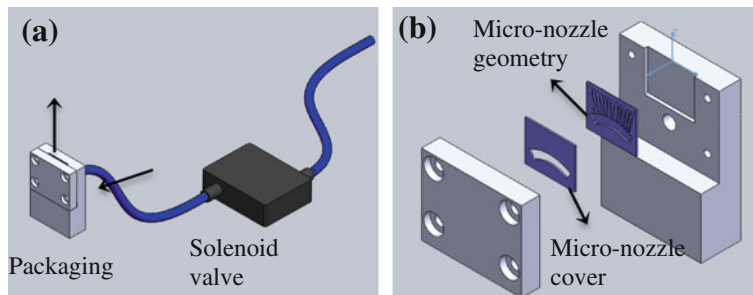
a Packaging and solenoid valve assembly. b Micro-nozzle geometry and packaging
